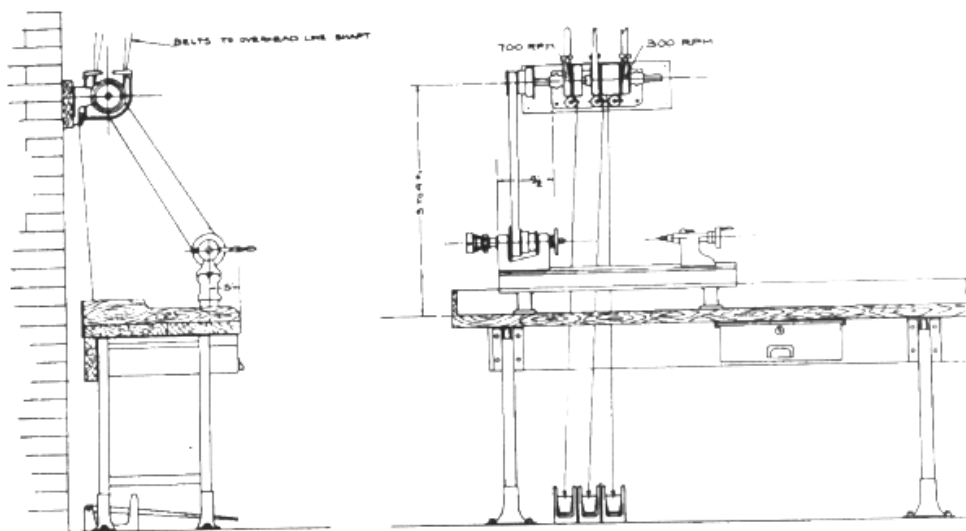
Dimension diagram of Countershaft on wall above Bench, Bench Drawer, drive from overhead lineshaft, and Plain Foot Treadles
